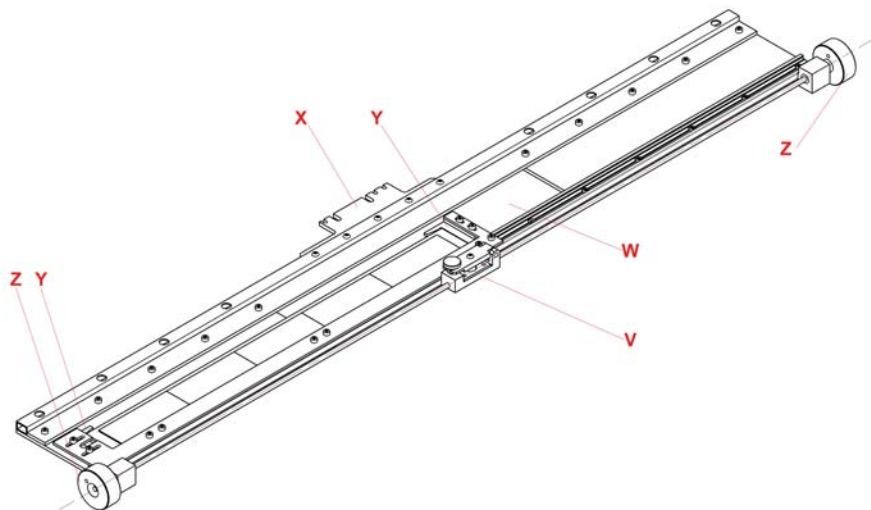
OLYMPUS BX50 equipped with the long slide holder: X – left and right hand micro-screws, Y – C-shaped handles for 400 mm glass slide, Z – clutch with a felt spindle for shifting transfer
